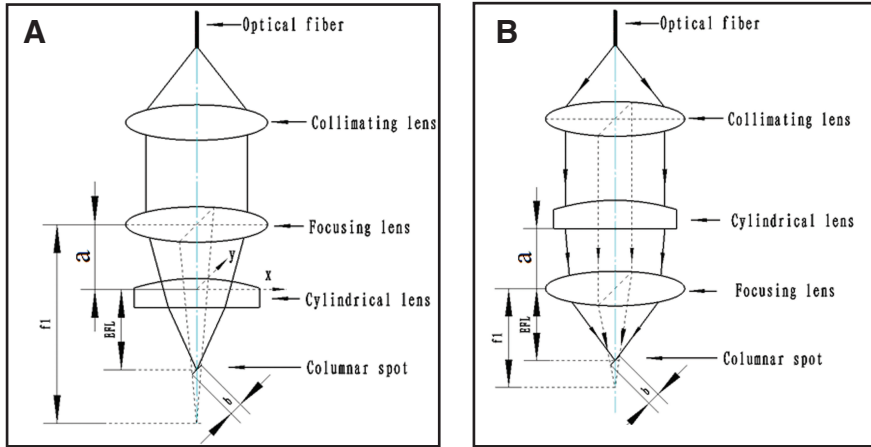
Schematic diagram of columnar laser spot welding. A — Cylindrical lens behind focusing mirror; B — cylindrical mirror in front of focusing mirror.
